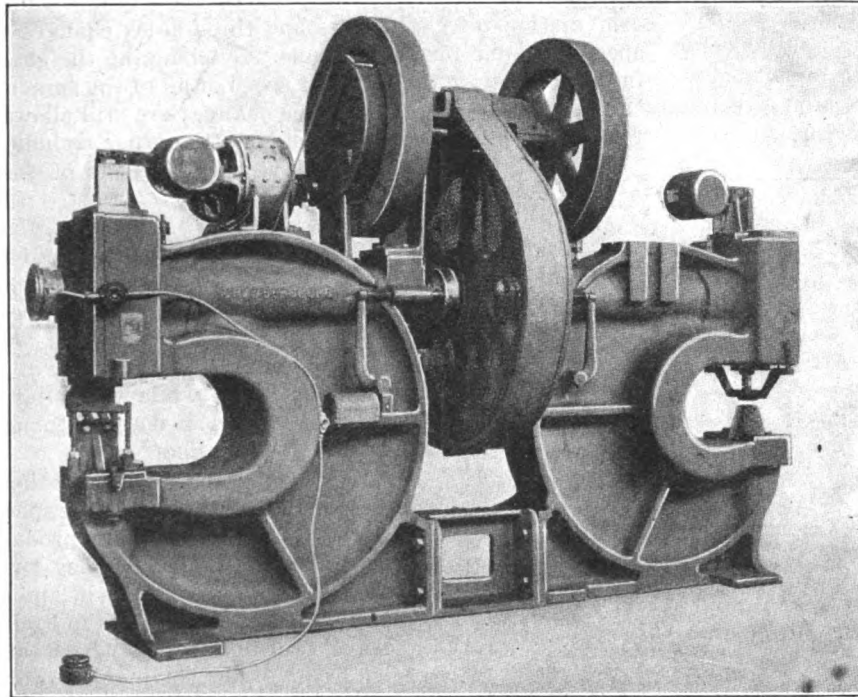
CHAMBERSBURG DOUBLE-END PUNCHING AND SHEARING MACHINE WITH ELECTRICAL CONTROL
